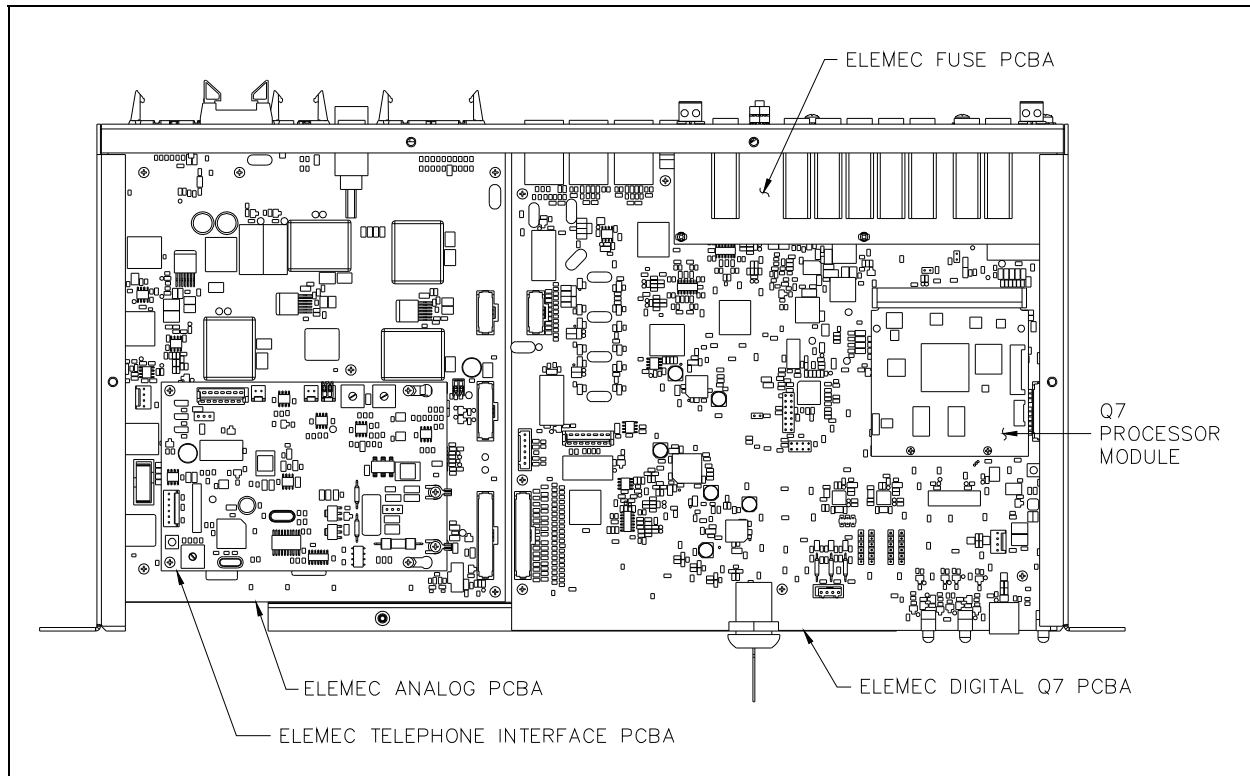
Elemec3 System Controller – Internal Components – Top View
